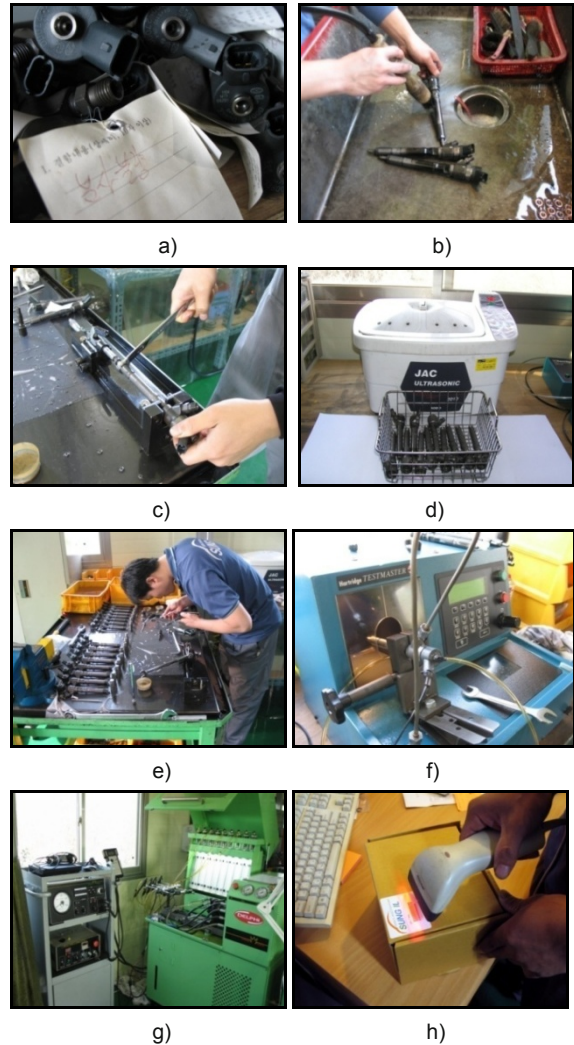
Basic remanufacturing steps of the first company: a) Collection of injector core; b) washing process; c) disassembling; d) cleansing under high frequency; e) inspection and assembling; f) initial performance test; g) secondary performance test; h) packing and barcode registering.
